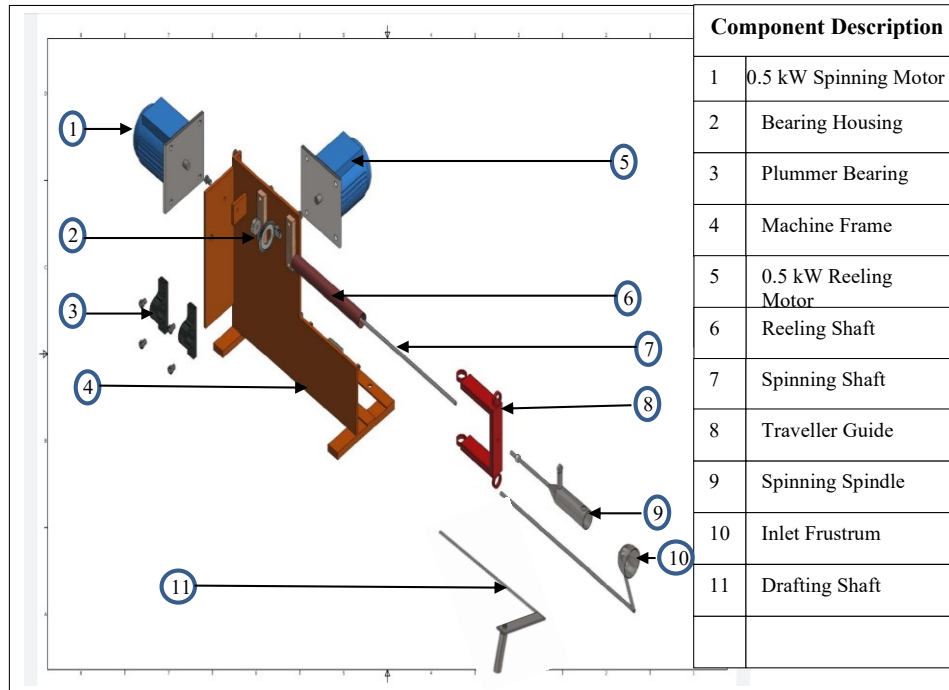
Exploded View of the Kenaf Spinning and Reeling Machine
